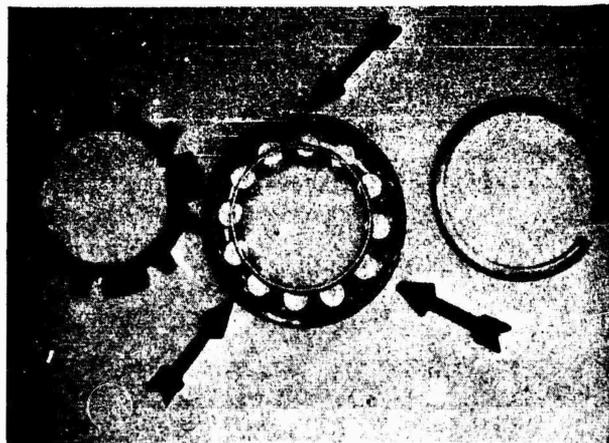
Snap-Ring Groove Broken Off Pinion-Shaft Pilot Bearing.
